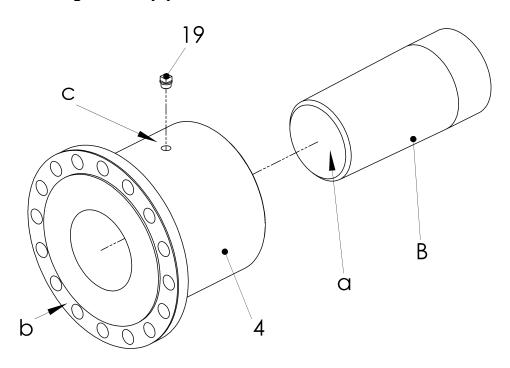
Mounting the hub (4) with conical oil interference fit
